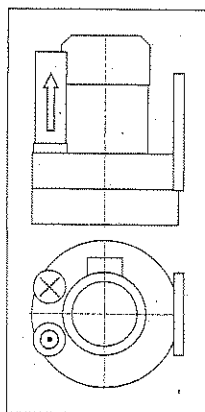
2BH1840-7G... (two-impeller pump-motor unit with double-flow design)
